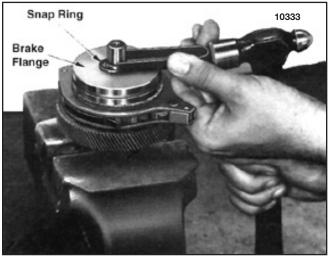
Removing Snap Ring from Load Brake Shaft
